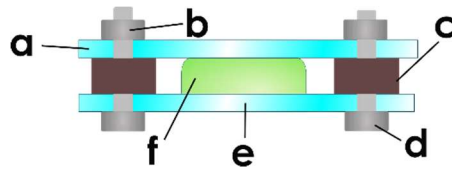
Casting process sketch. Two glass plates (a and f) contain the sample. A is quartz glass, transparent to UV. Each plate contains four holes. Bolts (d) are inserted into each hole, with spacers (c) to keep the plates a fixed distance apart. Polymer blend (f) is added and nuts (b) are screwed onto the bolts to fix it together.
